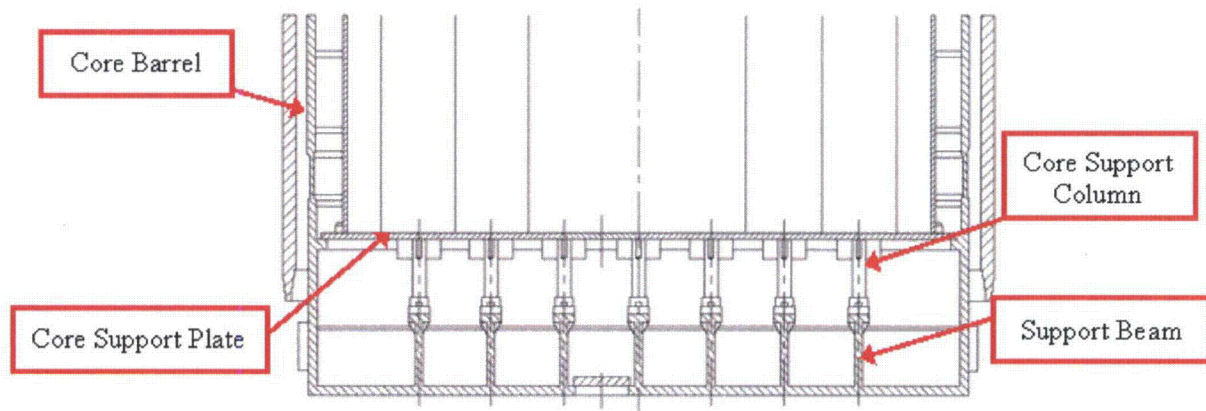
Schematic View of Palisades Lower Support Structure Assembly
